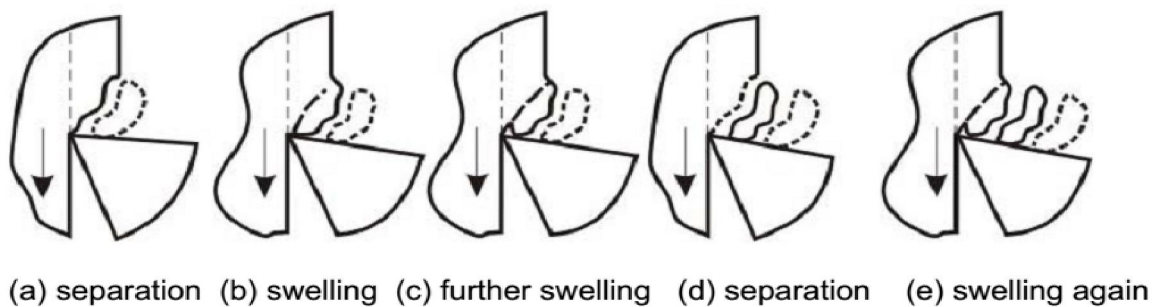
Schematic view of chip formation in machining brittle materials.
